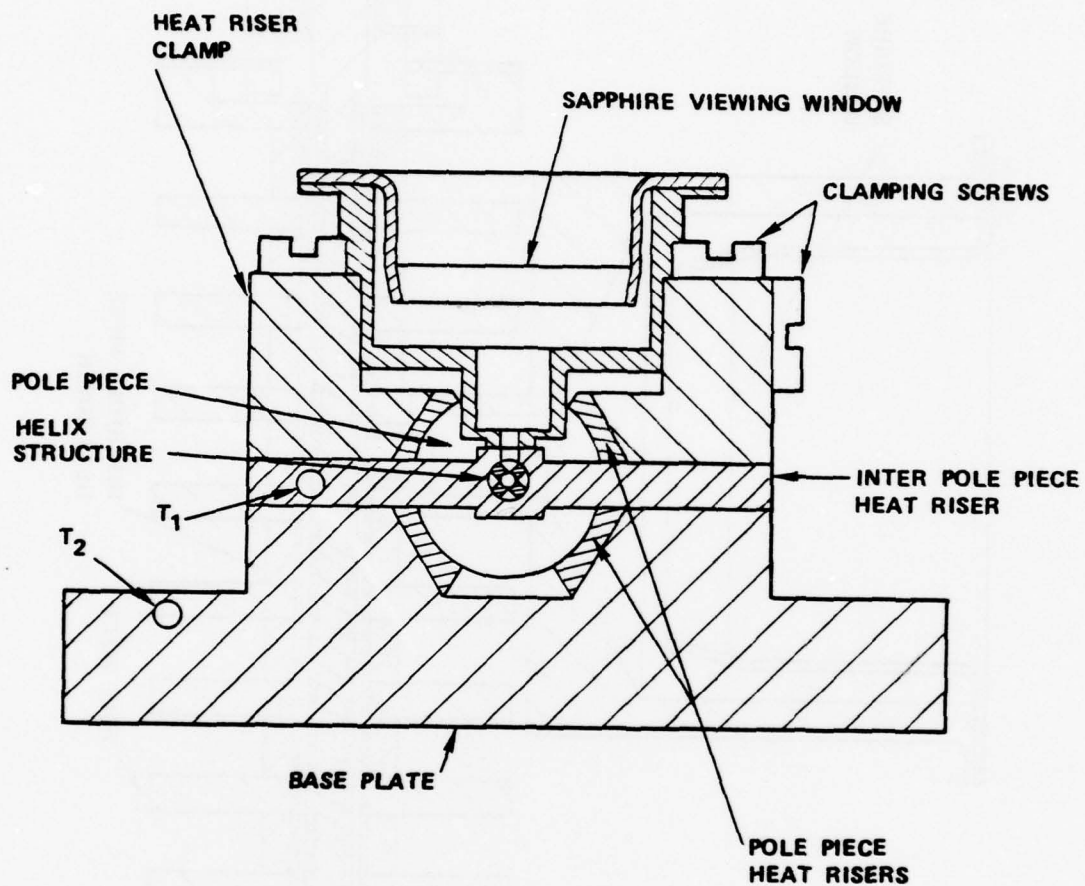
Schematic of millimeter wave helix tester mounted in package-type fixture.
